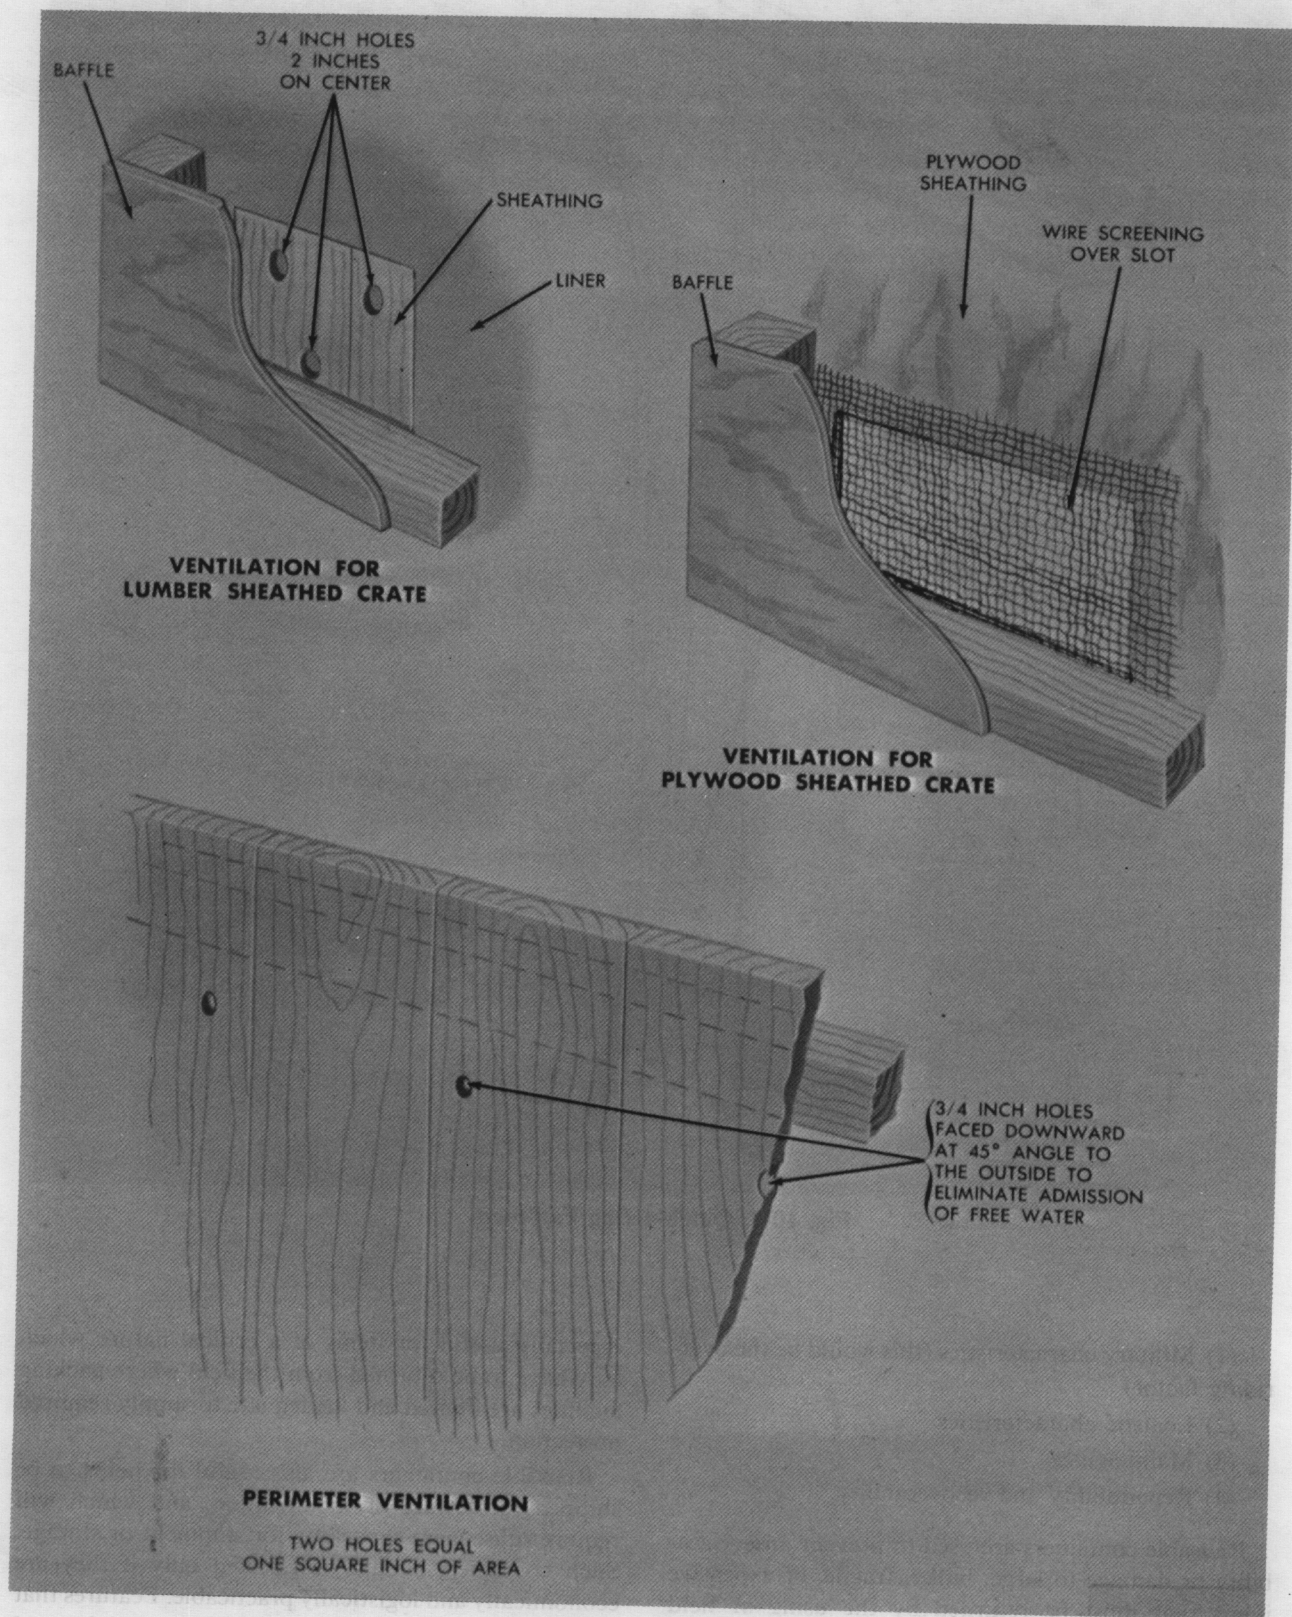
Providing Ventilation for MIL-C-104 Crate³
